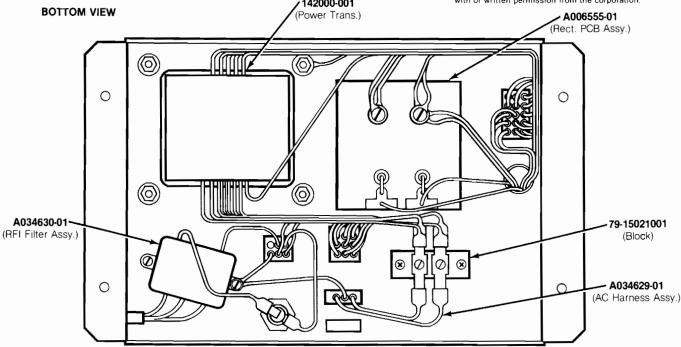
Power Supply Assembly for Color Raster-Scan Games A036099-01 A
